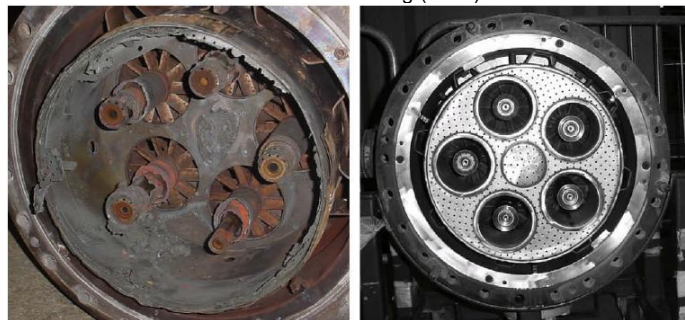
Burner Assembly(Left) damaged by combustion instability and new burner assembly(right)
